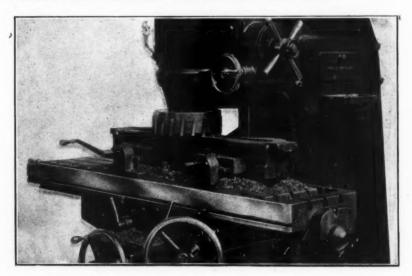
High-power Face Mill Roughing Bottoms of Vise Bodies.
